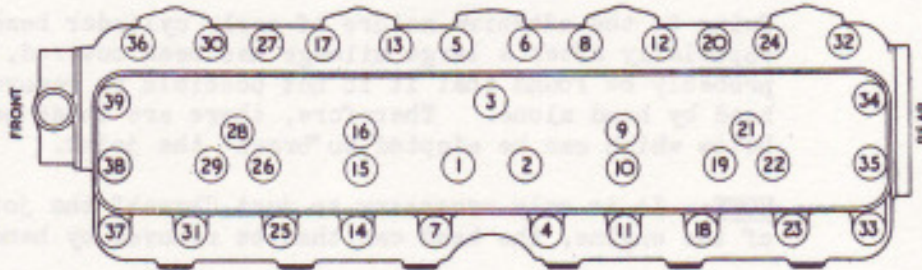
ORDER IN WHICH THE CYLINDER HEAD NUTS SHOULD BE TIGHTENED.
